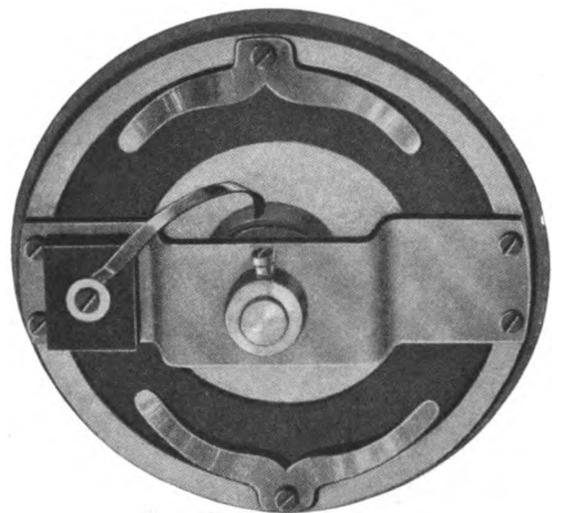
REAR VIEW OF ASSEMBLED TRANSMITTER.
